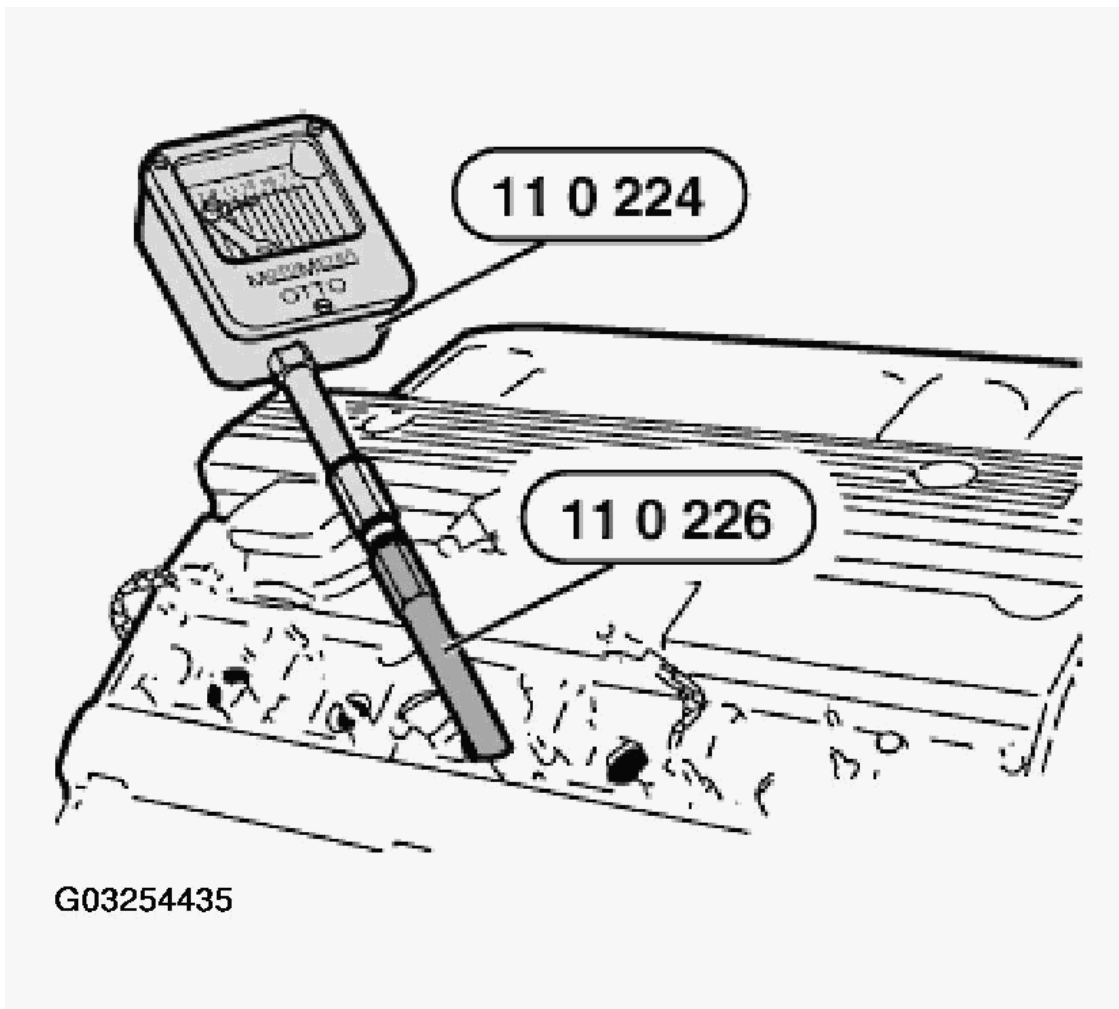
Identifying Special Tools 11 0 224 And 11 0 226
